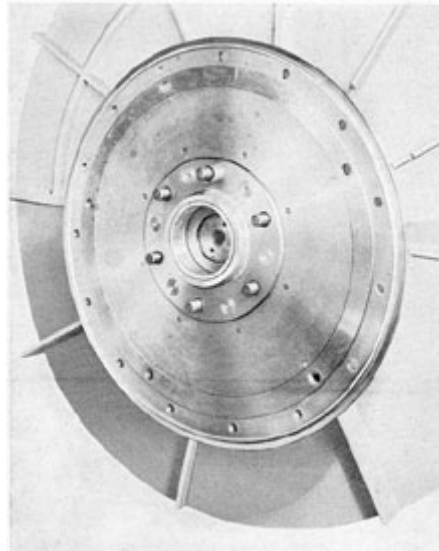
Elastic coupling, outer driving disk mounted on generator, GM
